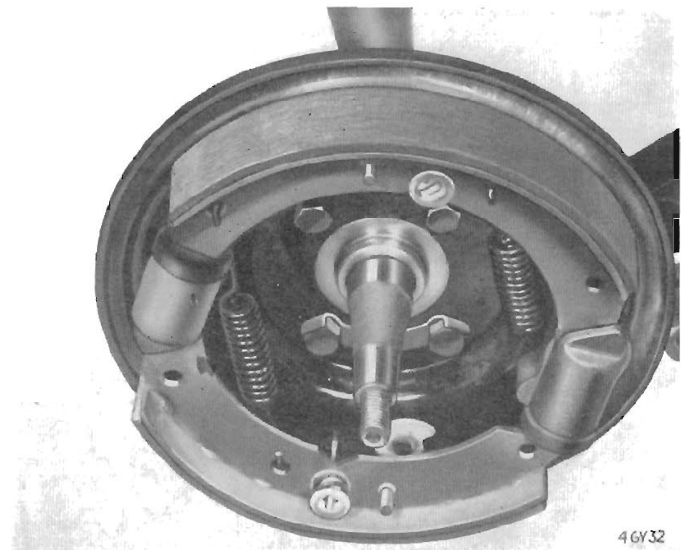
Securing the heads of steering attachment bolts with lock tabs
